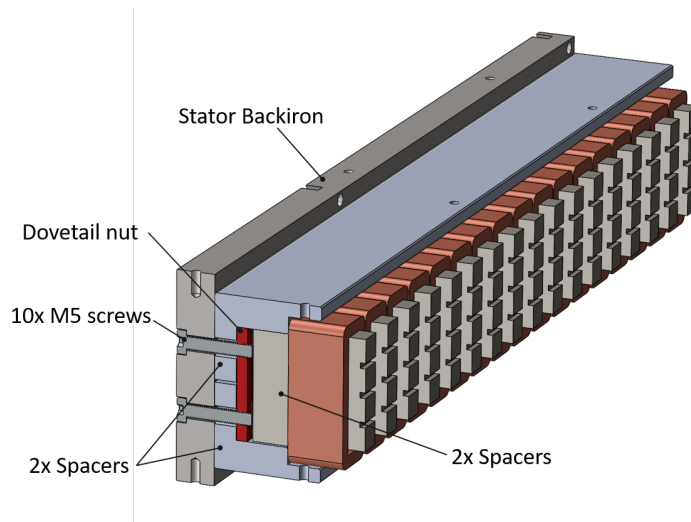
CAD model of motor stator, aluminum spacers, and stator backiron.
